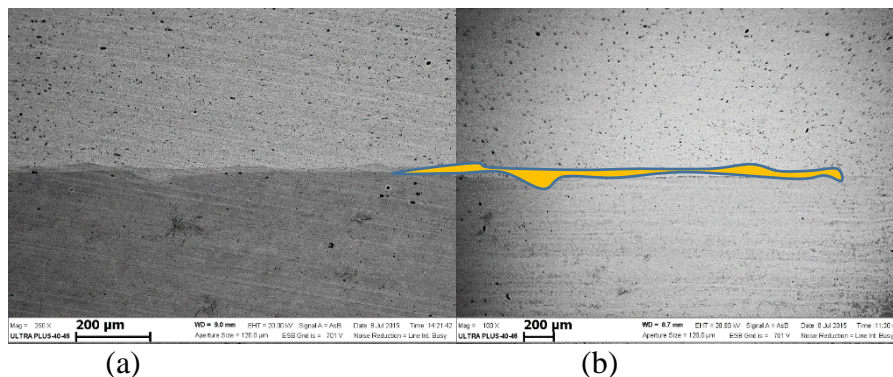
Weld seam in the 37G2F(below)/08Kh18N10T pipe: L = 100 (a) and (b) 900 mm.
